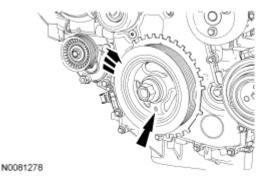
Locating CKP Sensor Electrical Connector Courtesy of FORD MOTOR CO.
